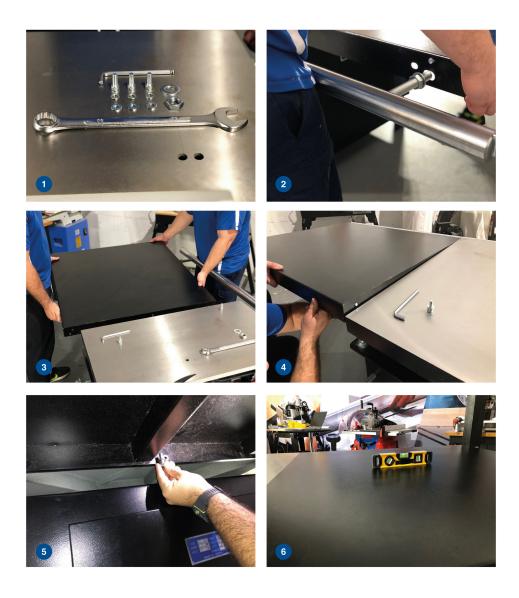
Use three bolts washers and lock washers to fix the rear table on the main body of the machine.
